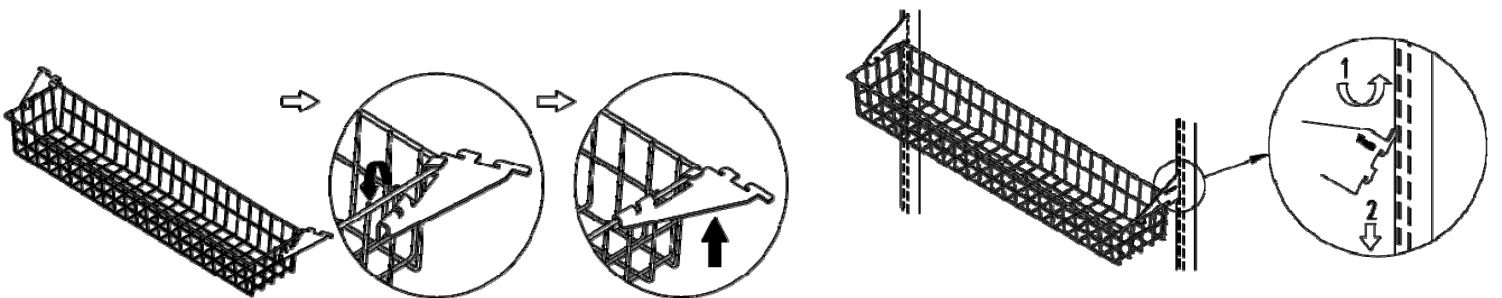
Metal Shelf Bracket installation and hanging installation
